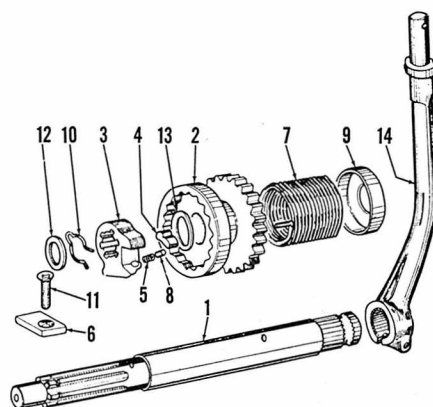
Exploded view of kickstarter assembly. Gear (2) engages gear (14—Fig. BS3-26).
